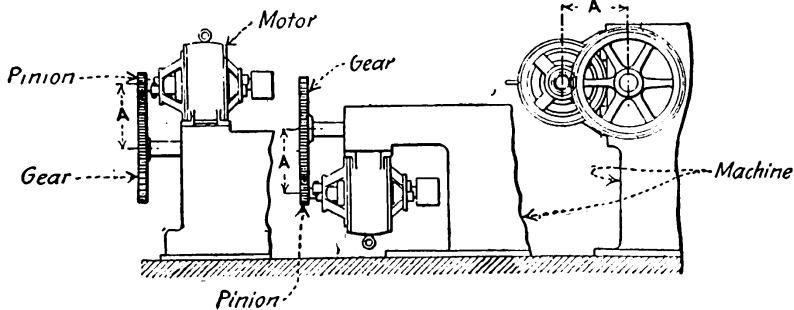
Motor mountings for gear drive (distances between gear centers limited).
